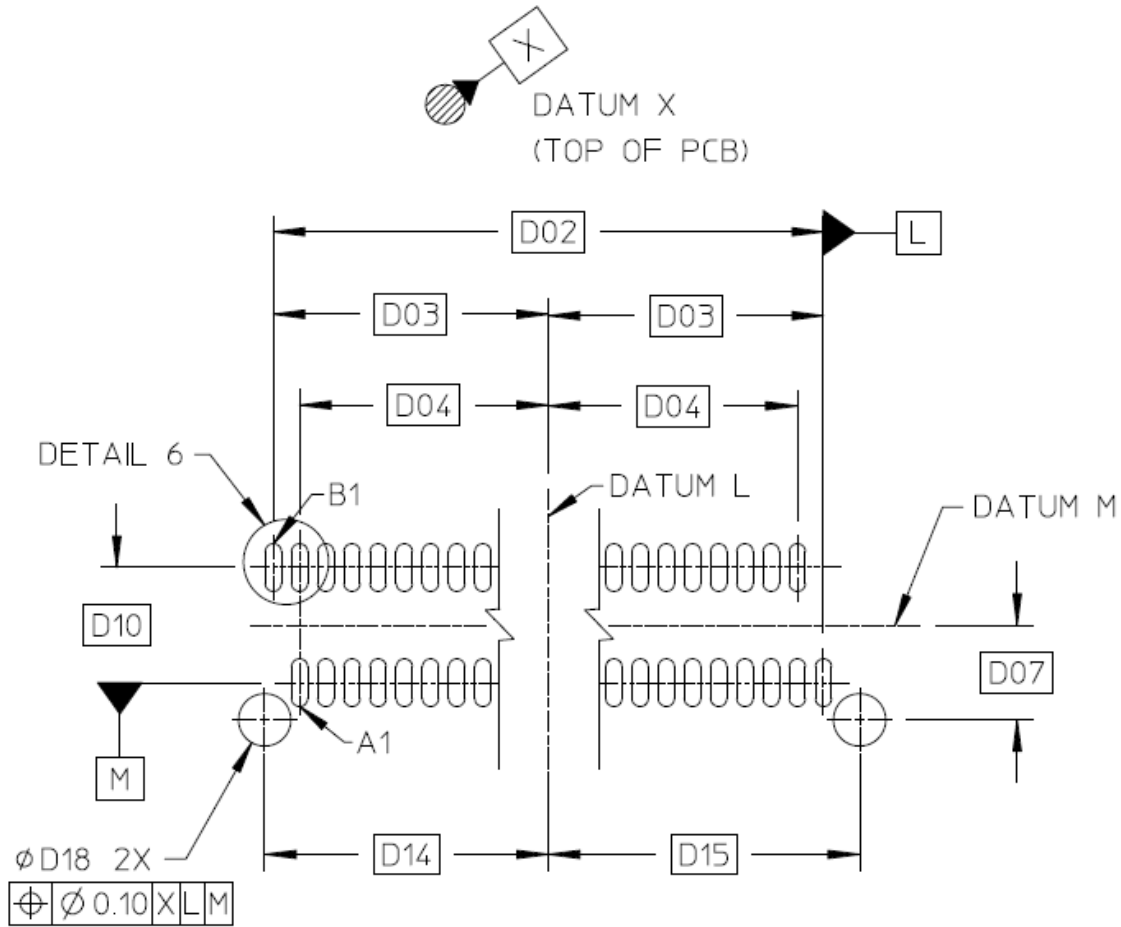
BOTTOM VIEW OF RIGHT-ANGLE FIXED RECEPTACLE FORM FACTOR
